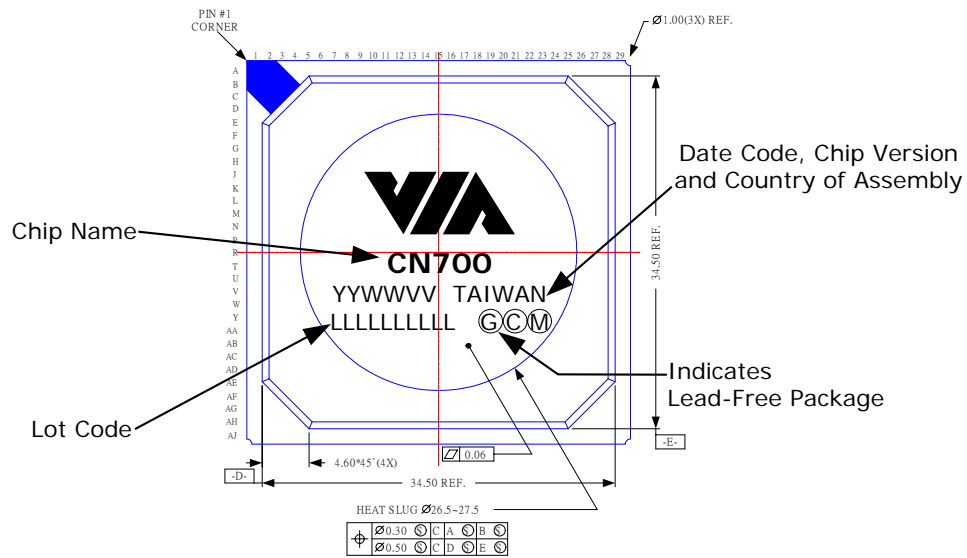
Mechanical Specifications - 567-Pin HSBGA Ball Grid Array Package with Heat Spreader
